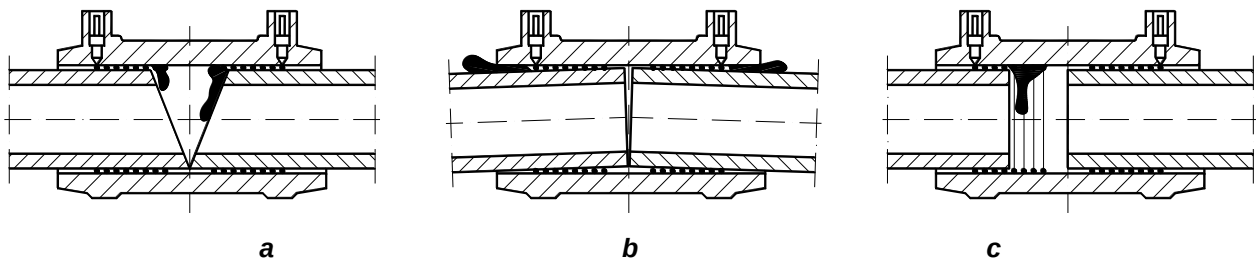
Defaults at electro-fusion welding: a – non-parallel pipes ends; b – angled pipes; c – partial penetration of pipes in the fitting.
